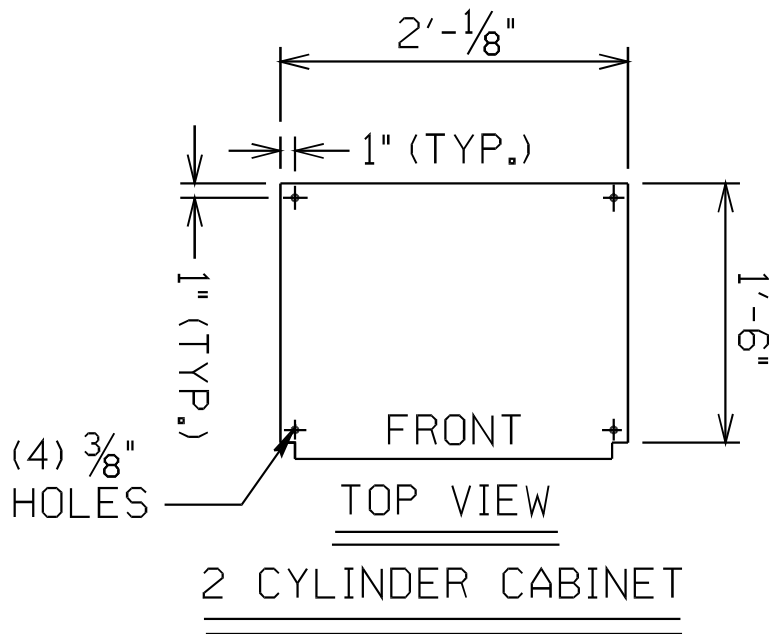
Mounting Hole Locations for 2 Cylinder Cabinet
